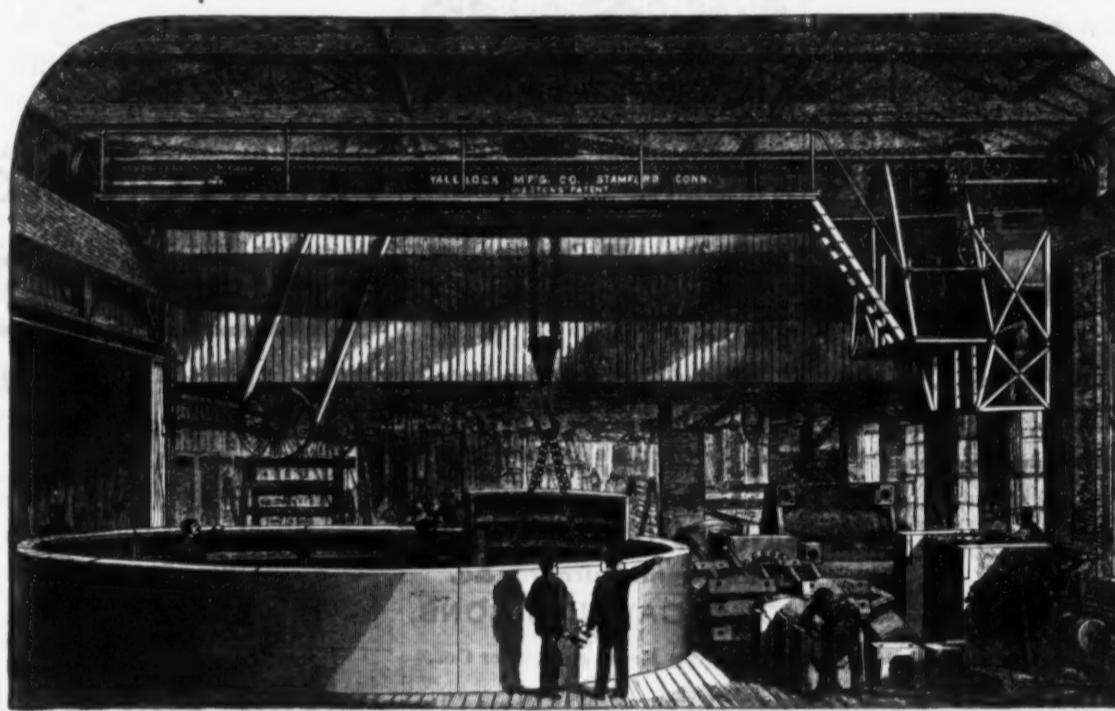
General View of Weston's Patent Power Traveling Crane.
